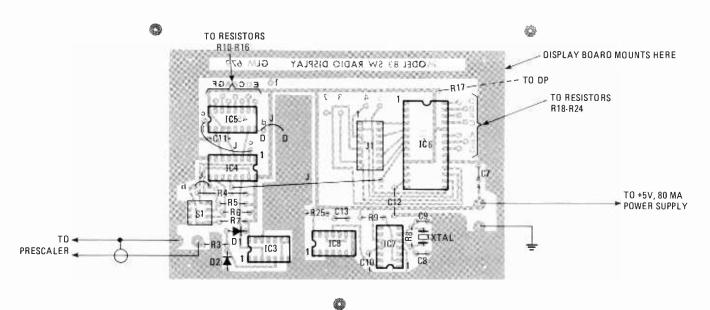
COUNTER BOARD IS TWO SIDED. Also shown is partsplacement diagram. Don't forget the four wire jumpers—A B C D. Note that it might be easier to mount jumper C on the reverse
